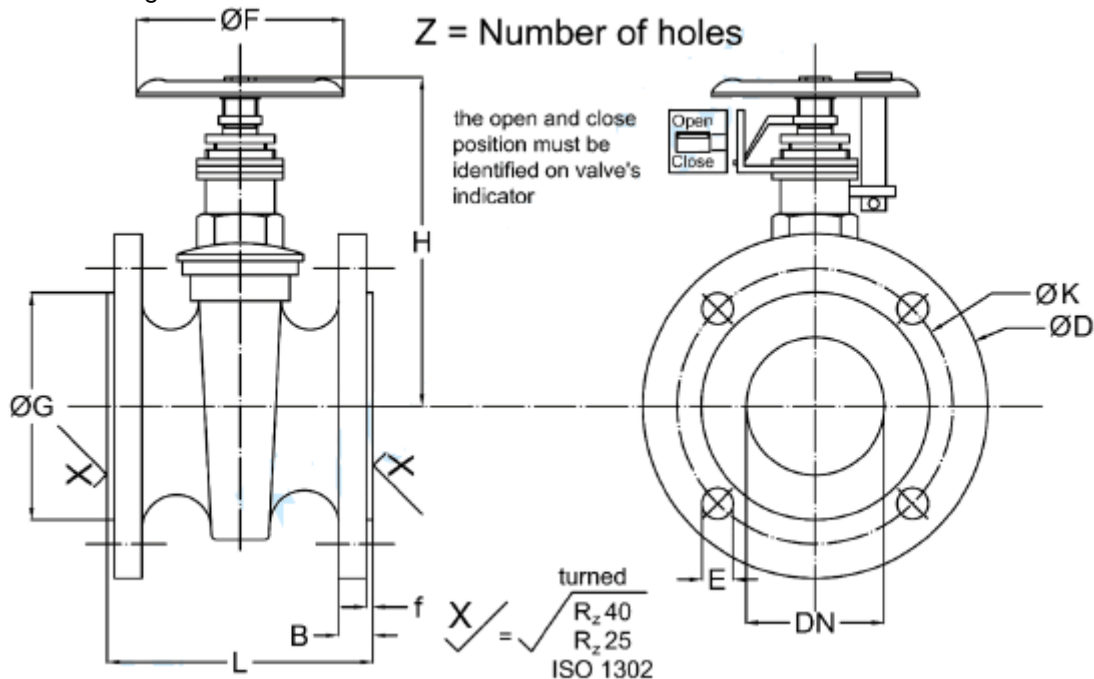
Overall view of copper alloy gate valve with dimensional parameters
